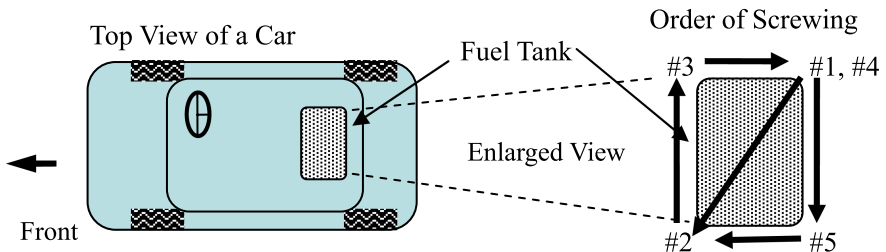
A fuel tank on car chassis and its correct screwing order to be attached
